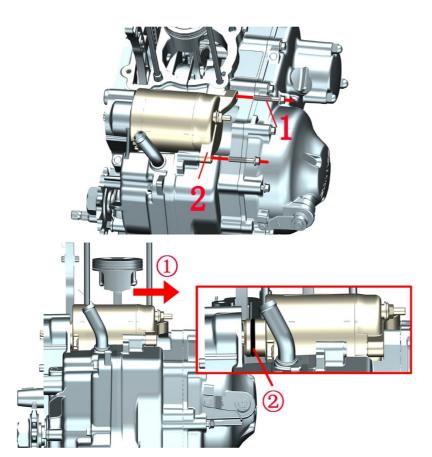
LE	ig.3 LEFT CRANKCASE ZT158MJ electric starter assembly-2		CHK
